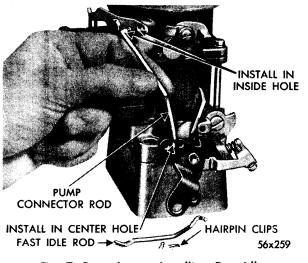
Removing or Installing Fast Idle and Pump Connector
